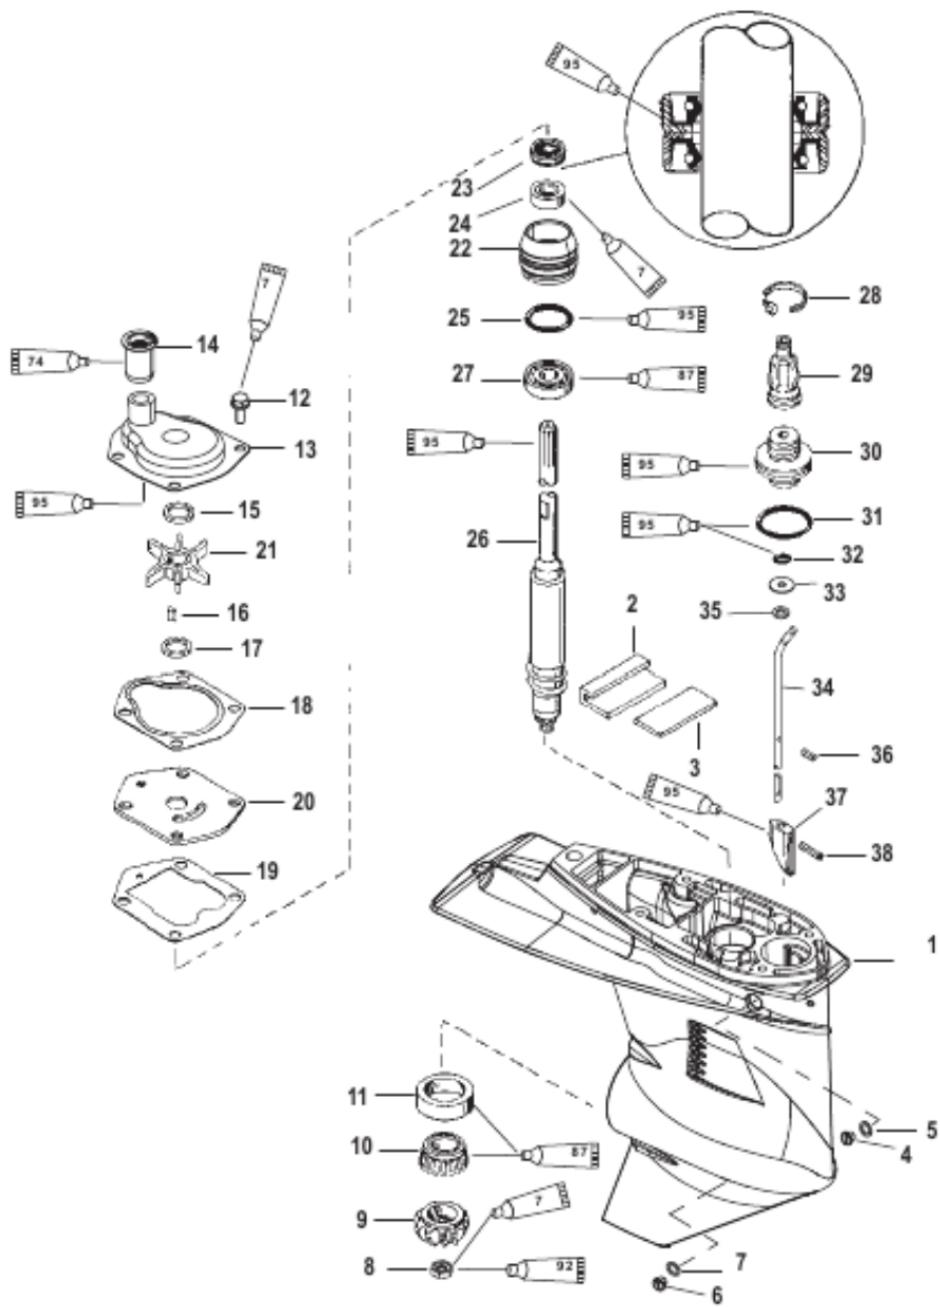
2D CAD drawing of the Mercury Lower Unit
